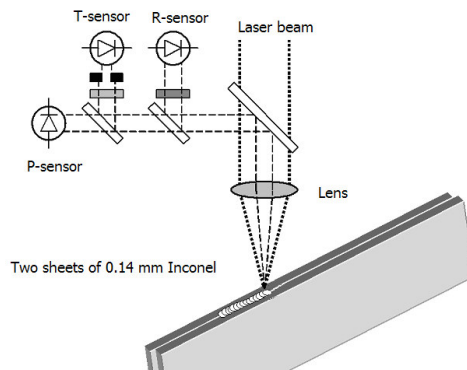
A schematic of the edge welding geometry for the ‘stable’ and ‘unstable’ welds.
